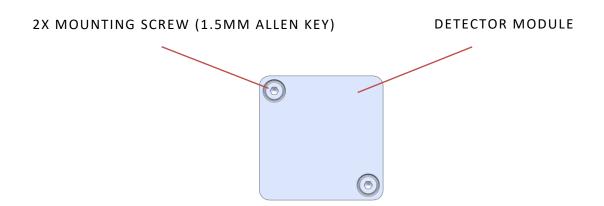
CUBE527R DETECTOR MODULE (FRONT VIEW)
